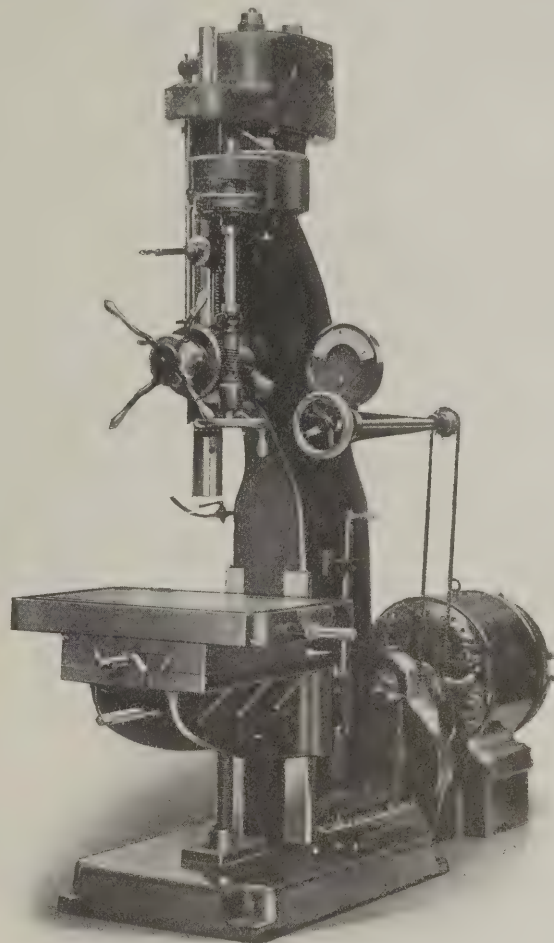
Foote-Burt Drilling Machine equipped with Speed Dial which is positively connected to Reliance Adjustable Speed Motor
